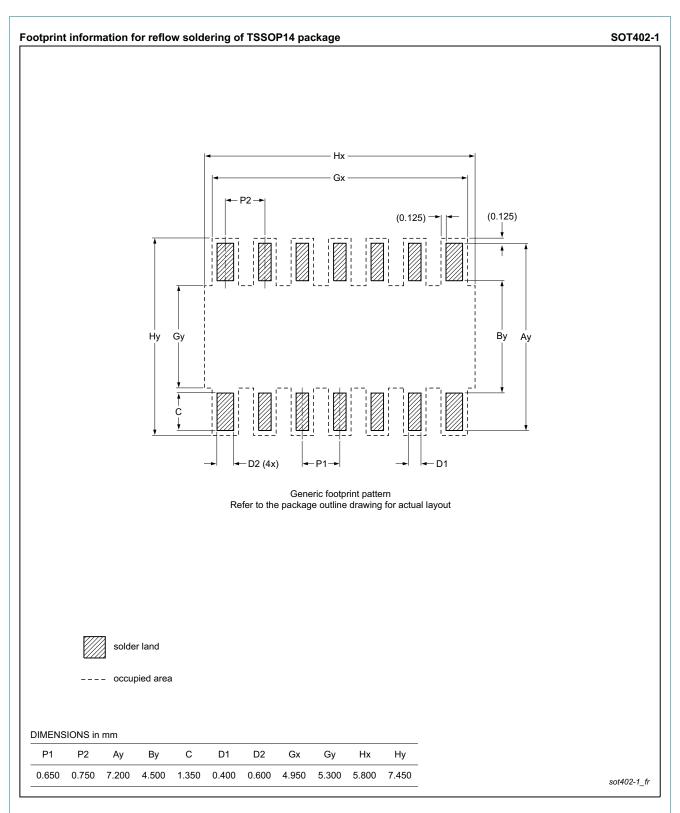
PCB footprint for SOT402-1 (TSSOP14); reflow soldering
